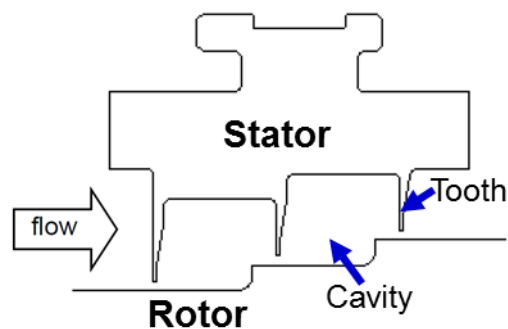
Schematic view of improved (stepped)labyrinth gas seal [3].
